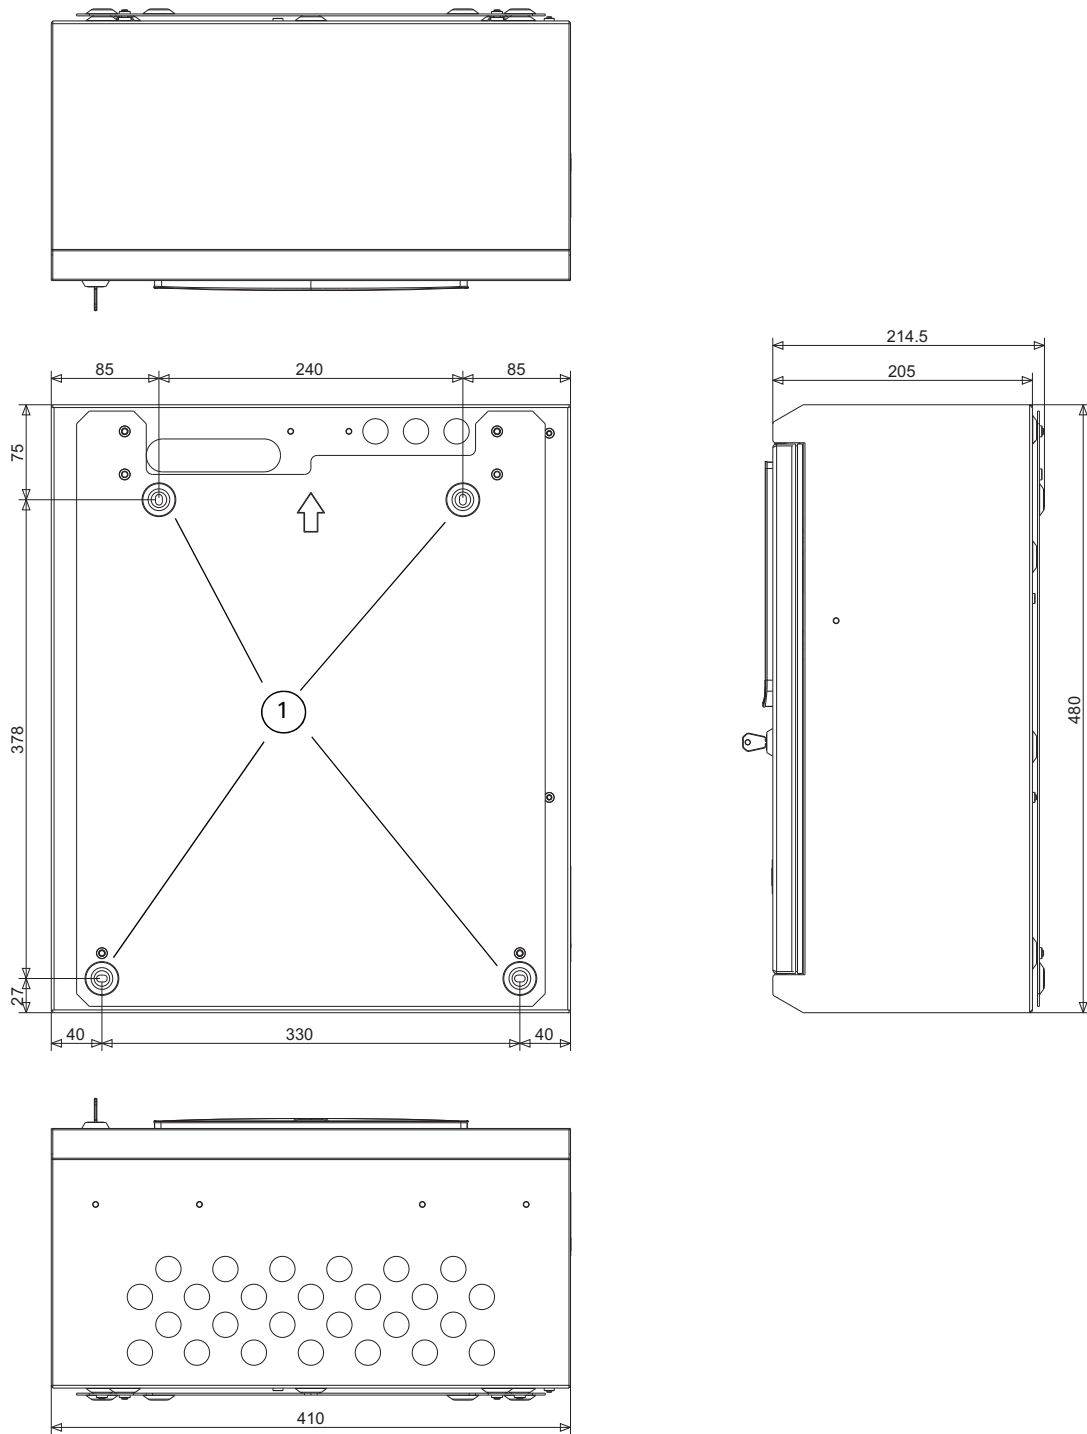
FC702D, FC718D, and FC708D panel mounting plate fixing and overall dimensions
